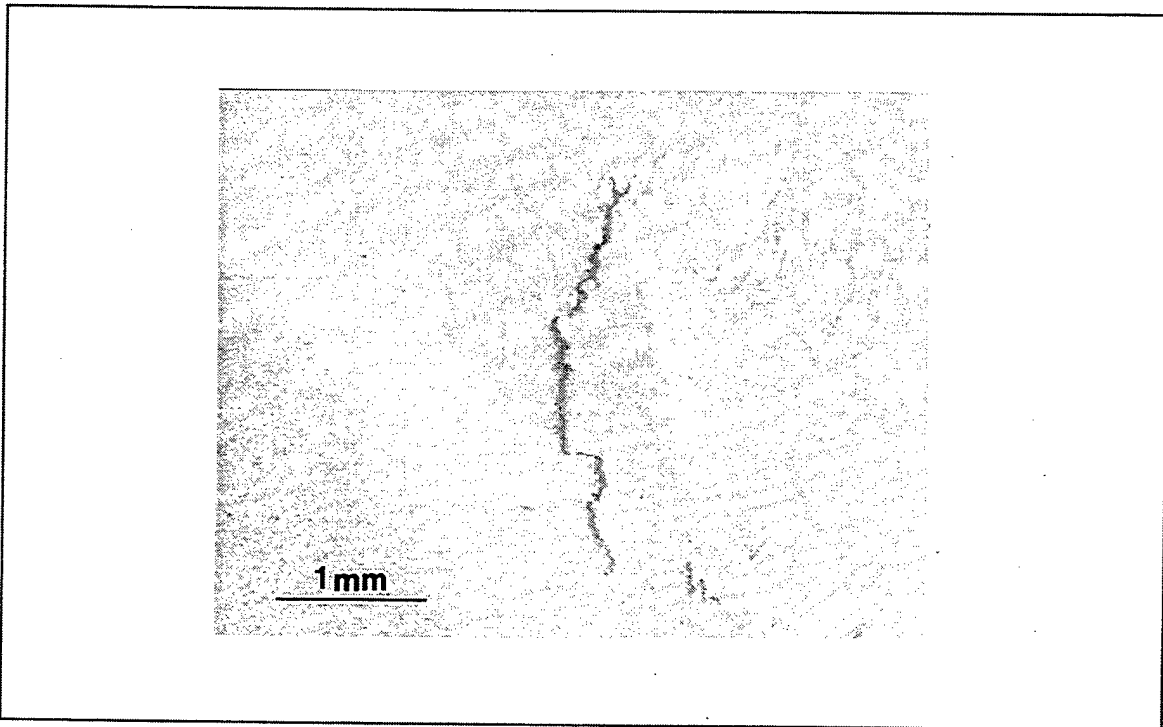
Upper crack in UWW10 weld sample from HAZ into the weld metal (See Figure 3.3).
